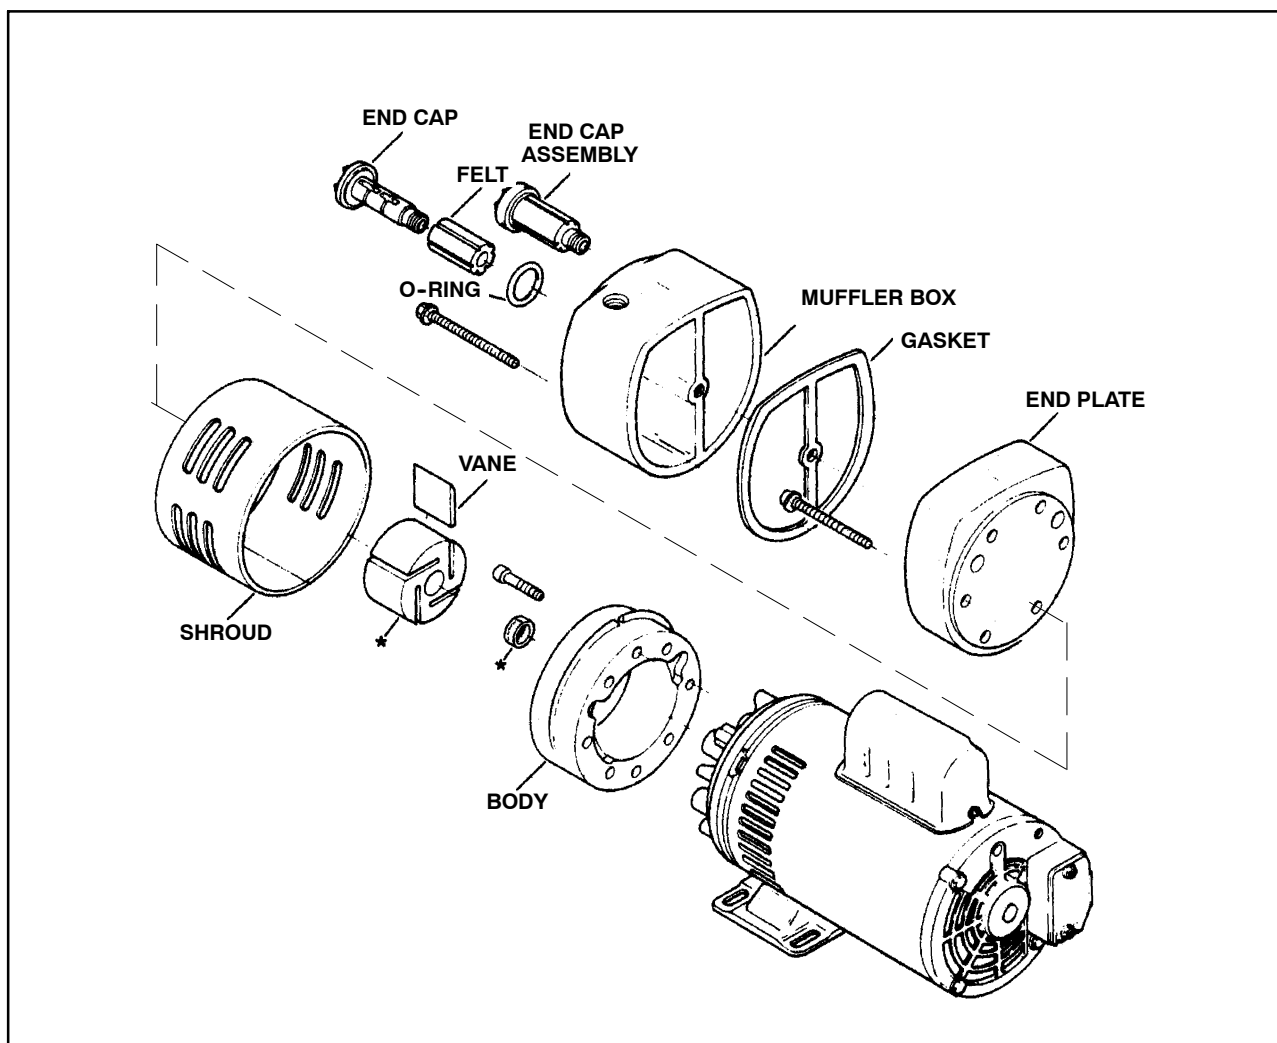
Gast Vacuum Pump Model 1023-101Q-G608X
